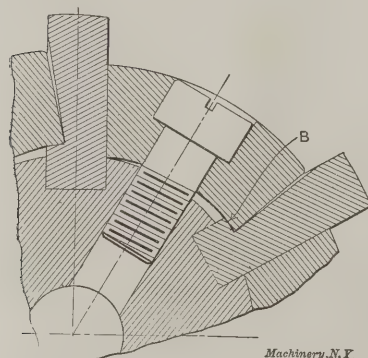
Enlarged Section of Reamer, showing Method of Binding.
